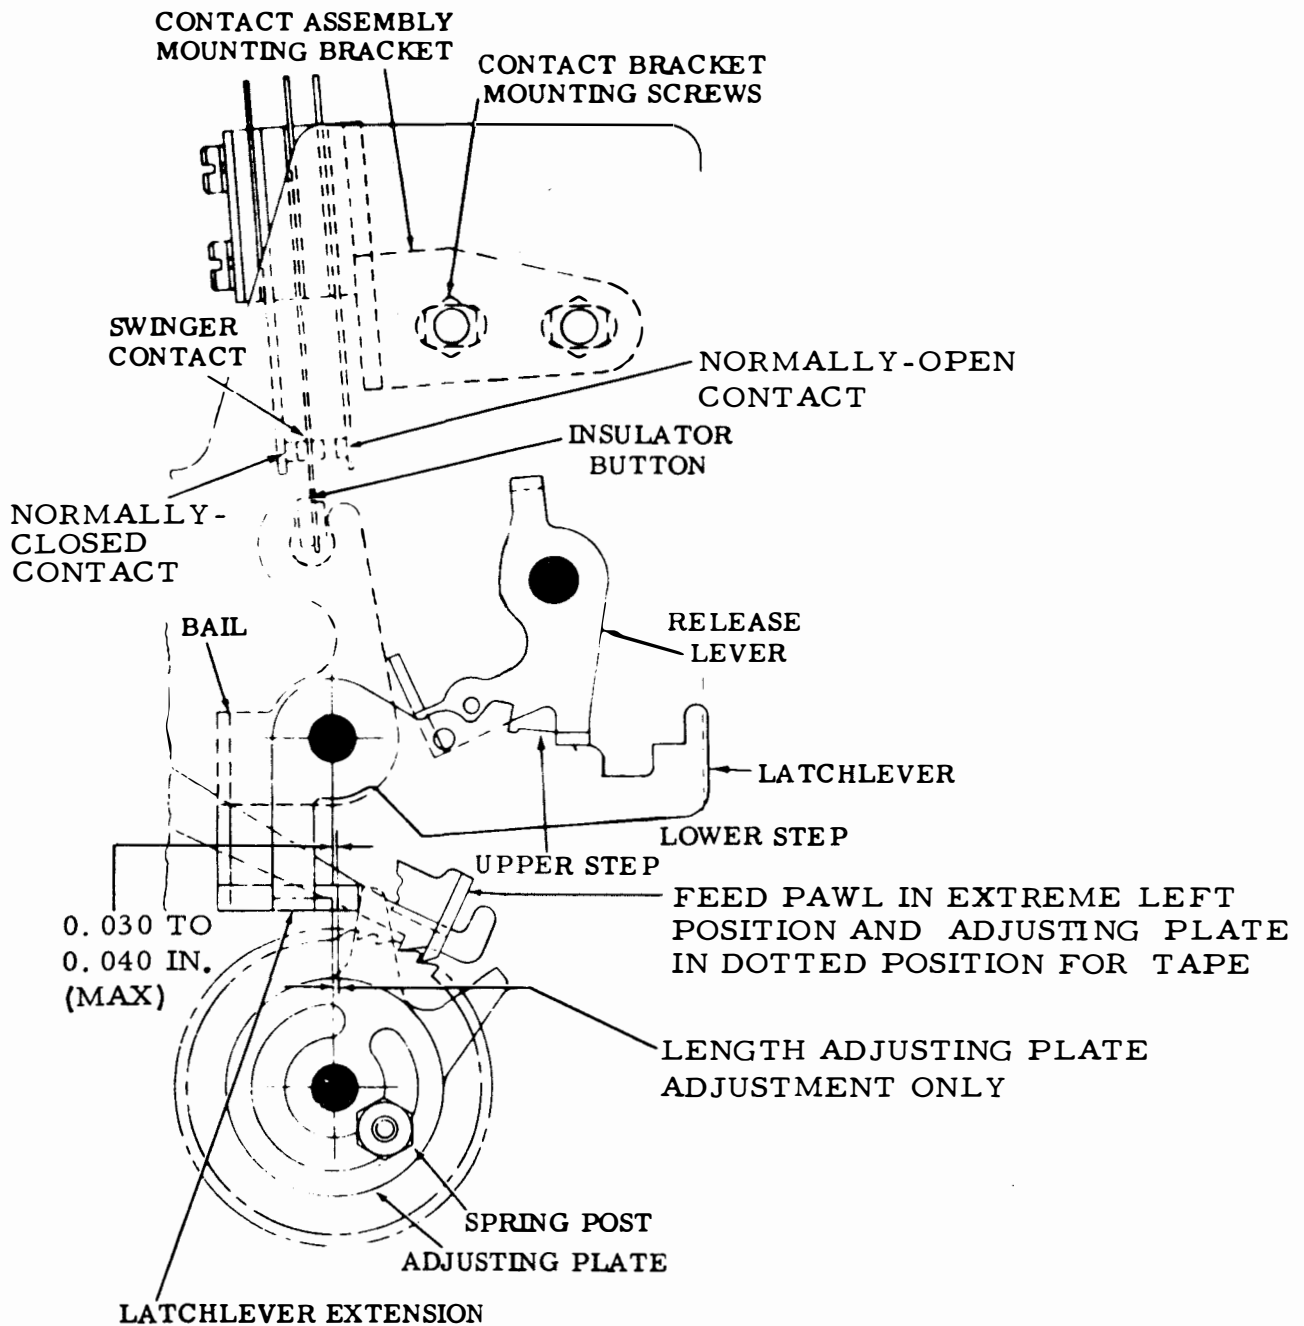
Tape Length Adjusting Plate and Contact Assembly Mounting Bracket
